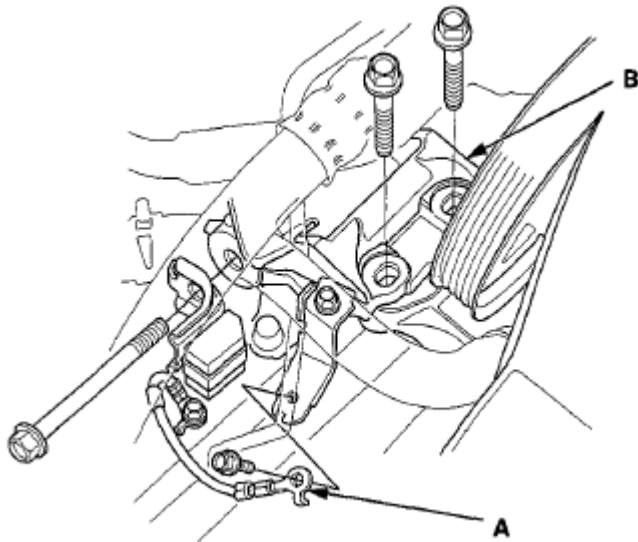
Identifying Side Engine Mount Bracket & Ground Cable
